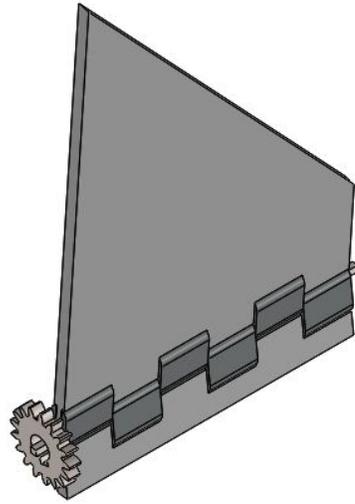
Rocket Fin & Flap Mechanism
